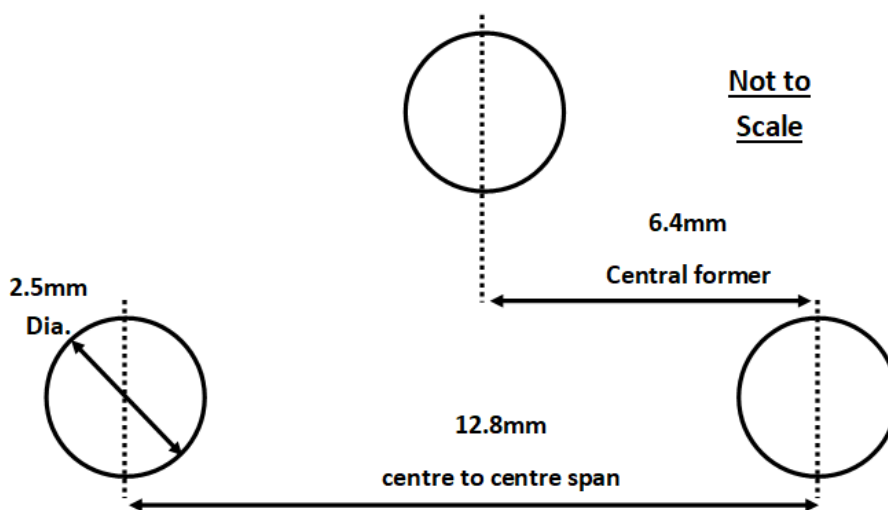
2.5mm dia. bend test tooling geometry.
